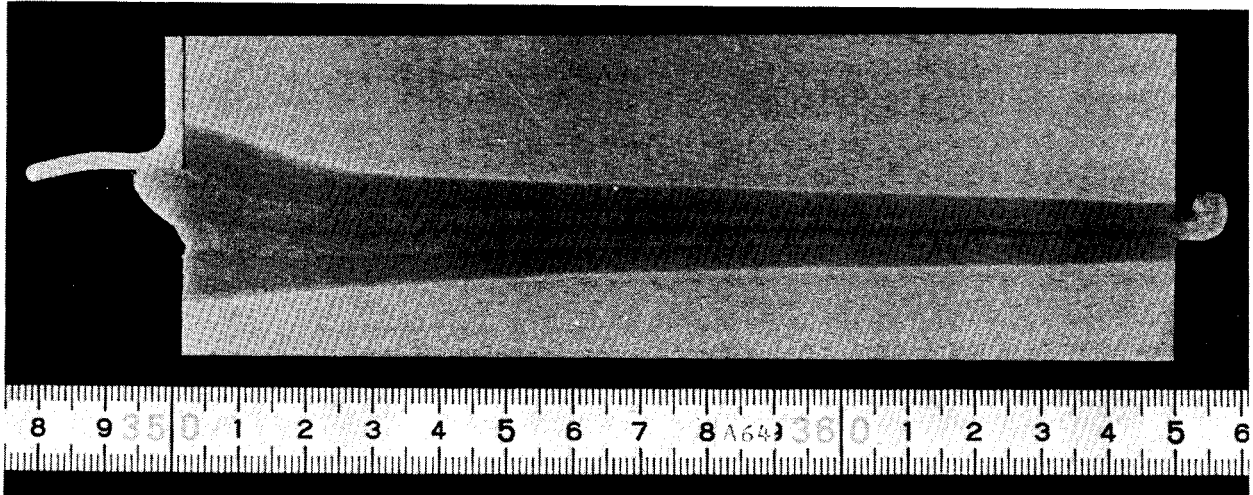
EB welded 150-mm-thick (6-in.) steel plate
